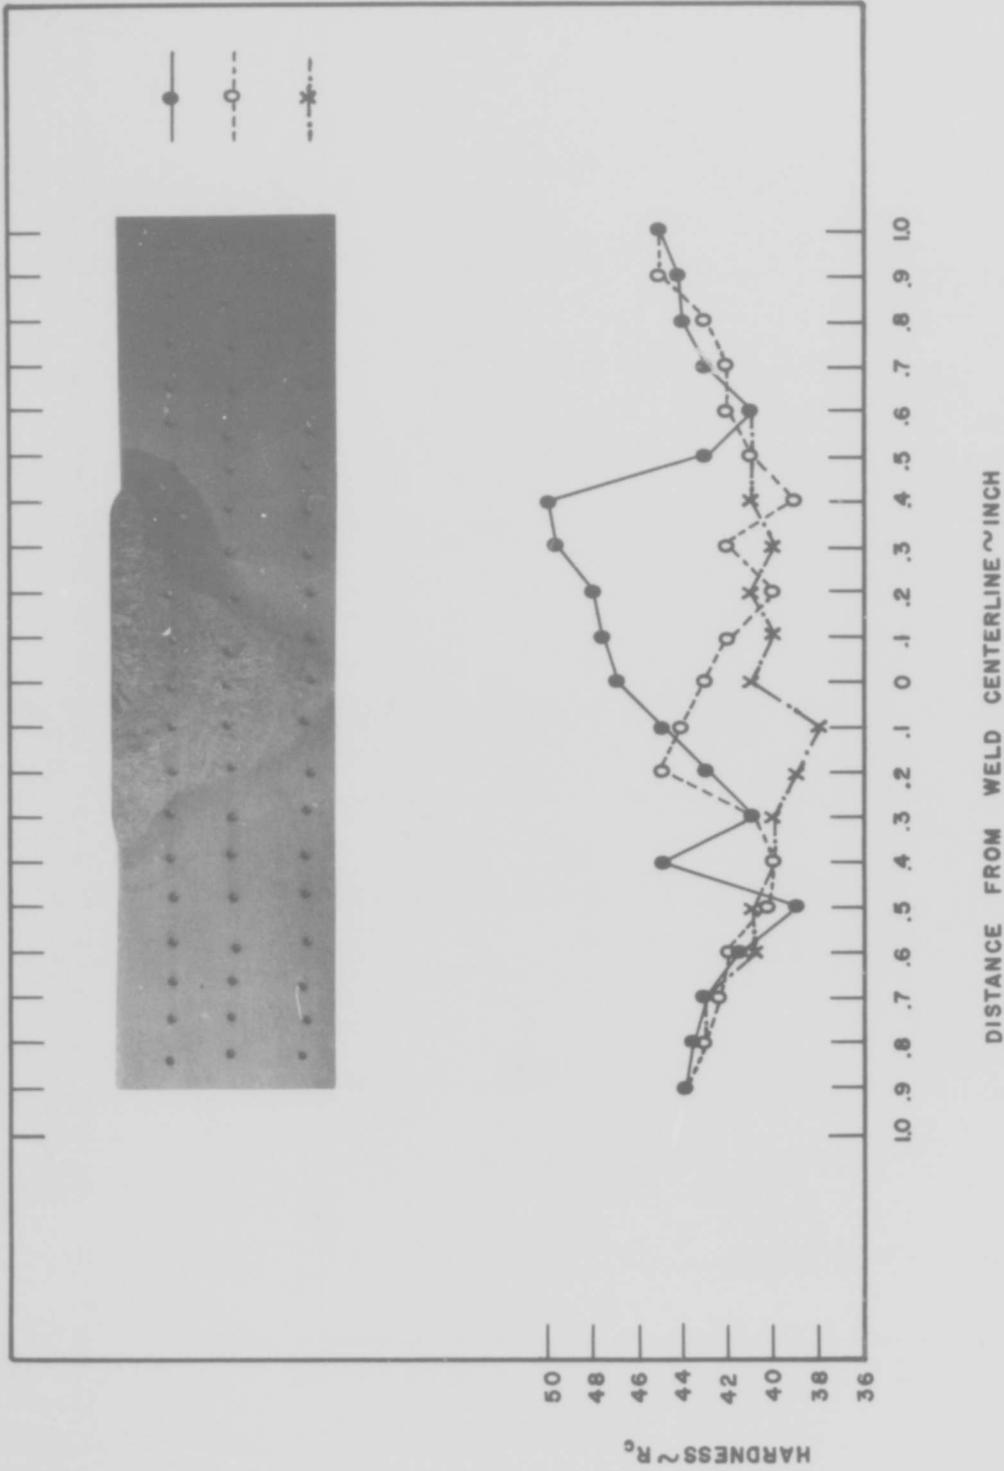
Hardness Survey of Multipass TIG Weld No. 0264 Made in HP 9-4-45 1/2-Inch Plate Using a 475°F Pre- and Post-Heat.
